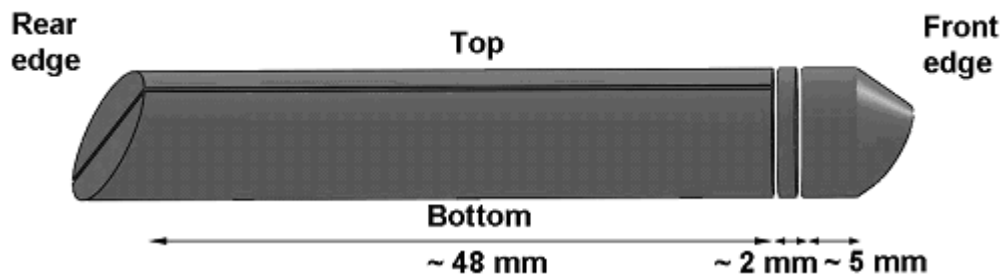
Schematic illustration of a CP Ti billet after ECAP showing the cutting method and dimensions.
